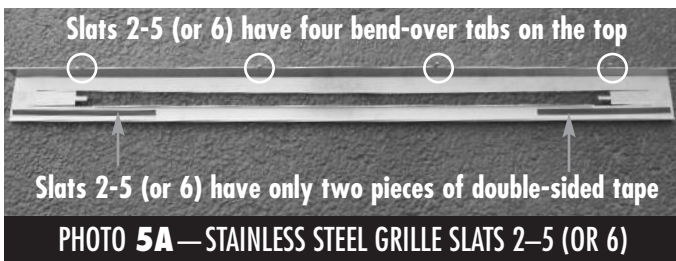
A— STAINLESS STEEL GRILLE SLATS 2–5 (OR 6)
